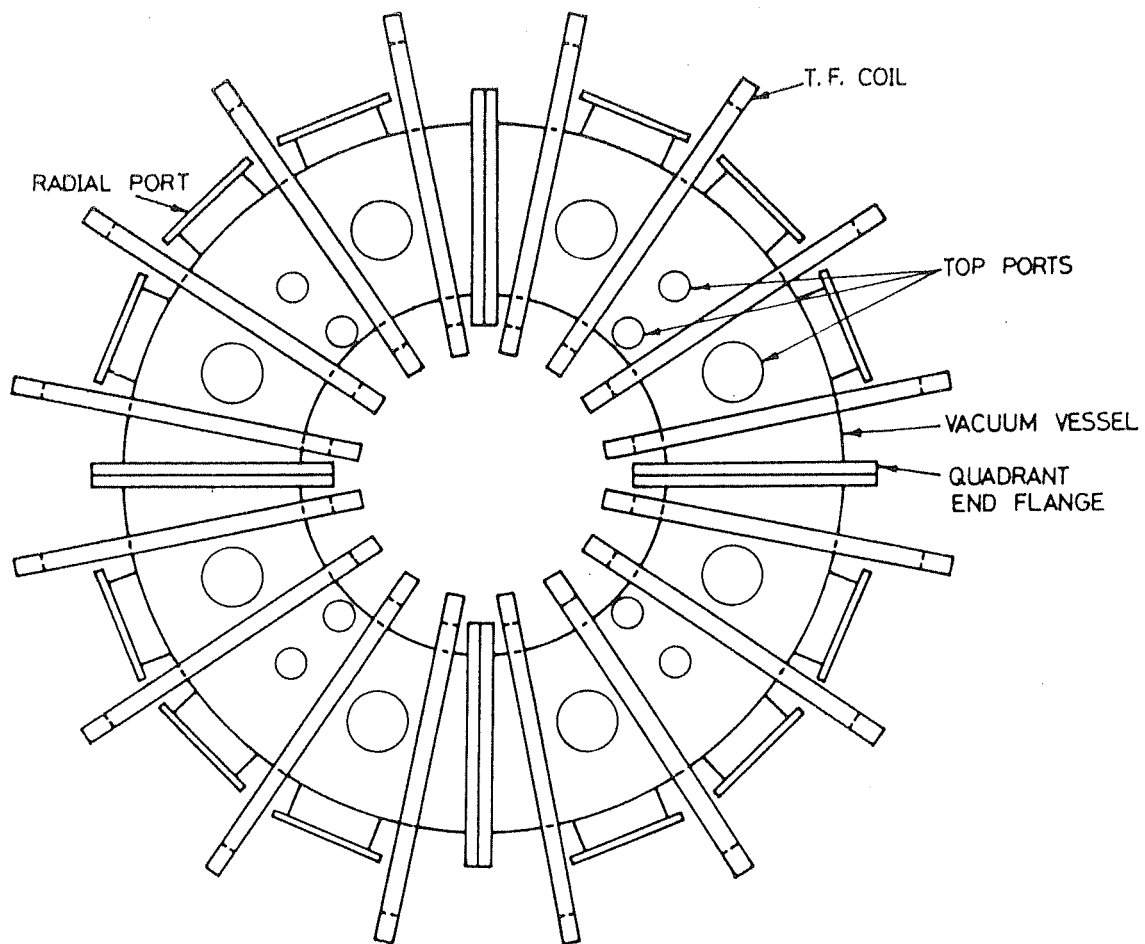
Top view of the vacuum vessel with T.F. coils
